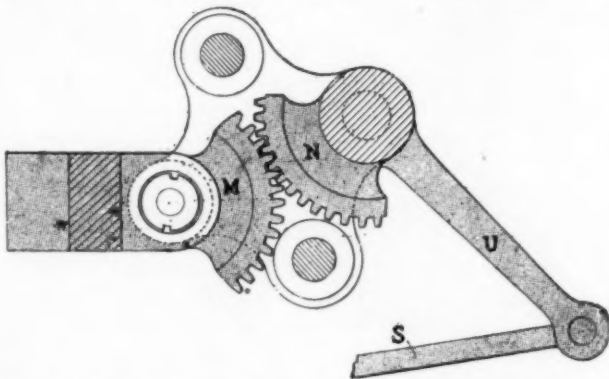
The Guiding Segment-Gears. *M*, *N*, Safety Gear for guiding the Hemispherical Gears. *U*, Steering-Rod. *S*, Steering Lever.
